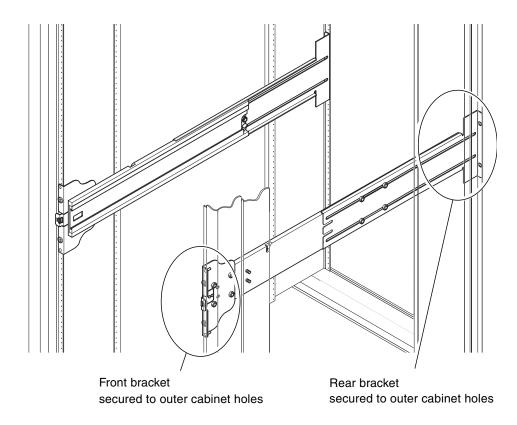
Installing the Rails in a Sun Rack 900 Cabinet or 19-Inch Four-Post Cabinet
